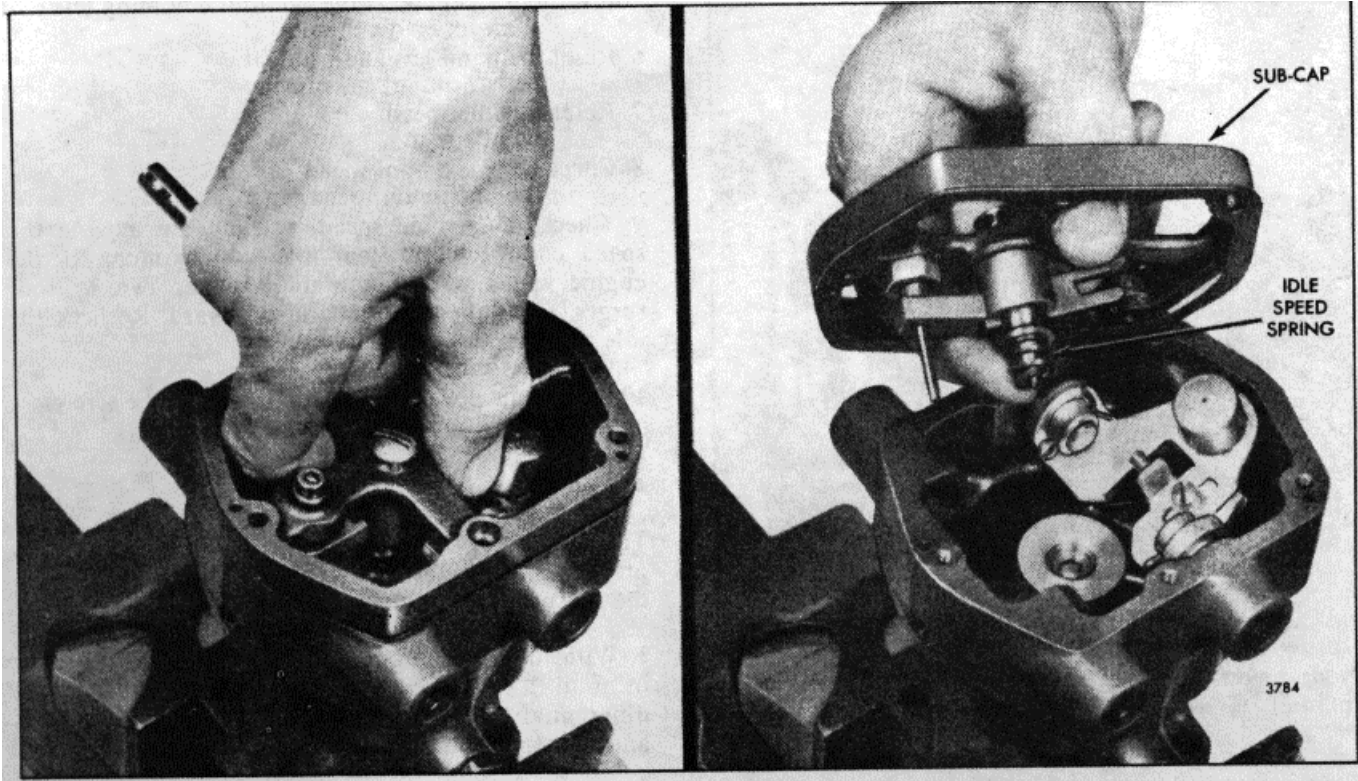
Removing or Installing Governor sub-Cap Assembly
